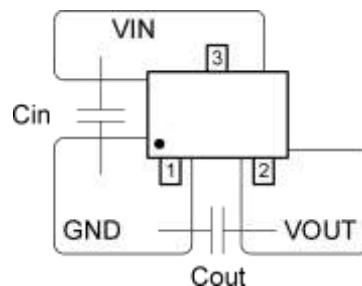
(B), Recommended PCB Layout of OCP2820WxxAD
